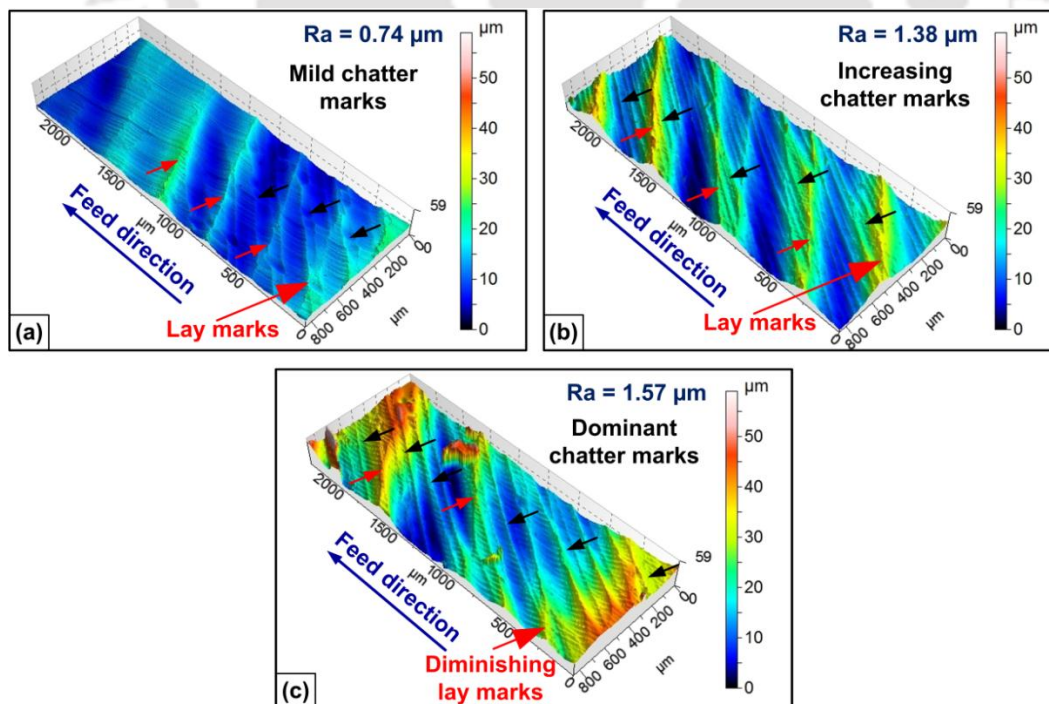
Topography of the machined surface obtained at the free end of the thin-wall using: (a) 8 mm tool diameter, (b) 12 mm tool diameter, (c) 16 mm tool diameter
